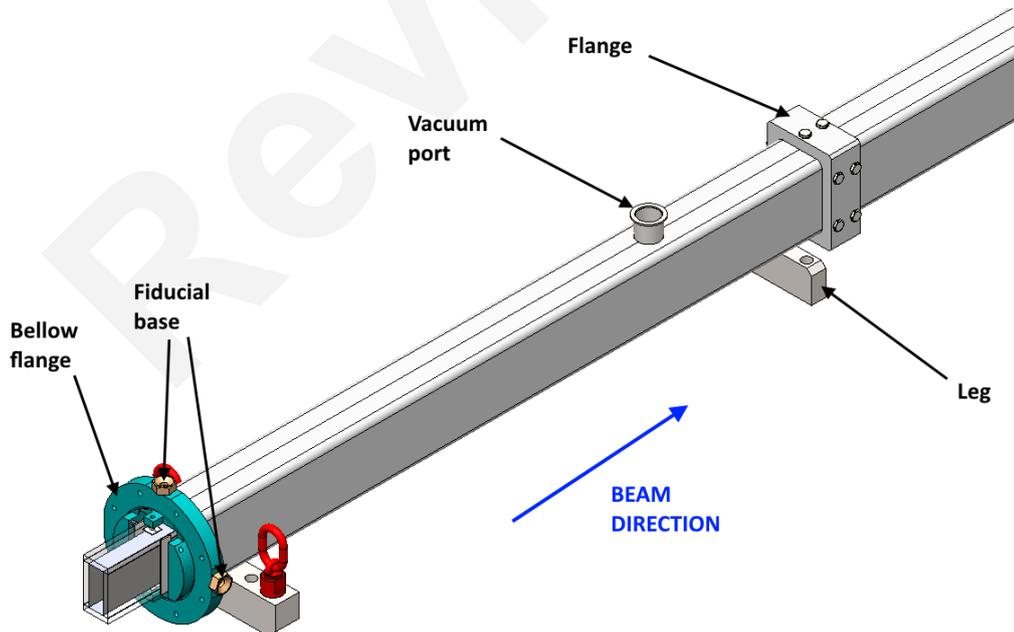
Upstream part of the vacuum housing showing fiducial point on bellow flanges, vacuum port and flange connecting beam units.
